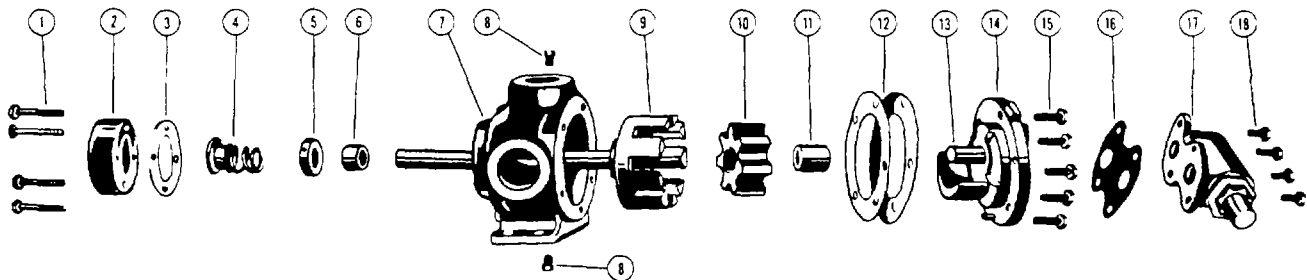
EXPLODED VIEW MODEL H AND HL432 PUMP
